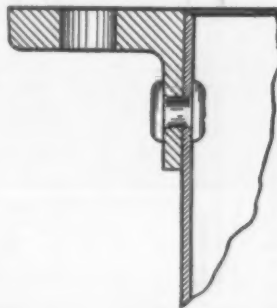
Cross Section through Rivet Hole, Showing Method of Attaching to Pipe.
